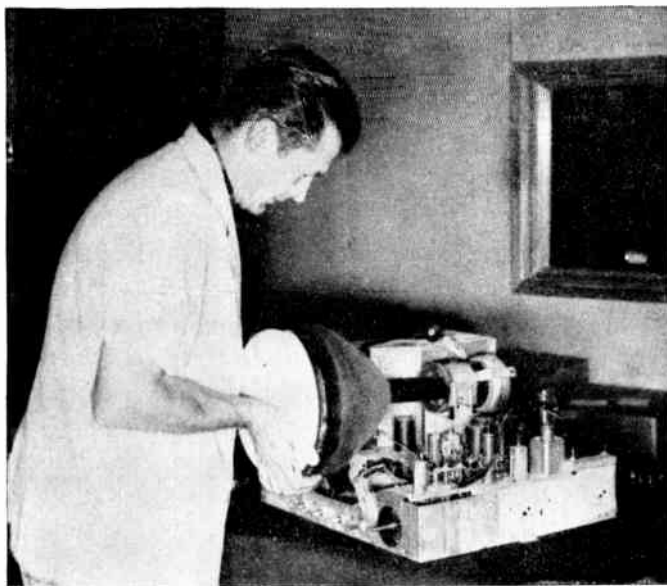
Removing a picture tube. The tube is carefully guided out of the yoke assembly to avoid breakage due to binding or tilting
